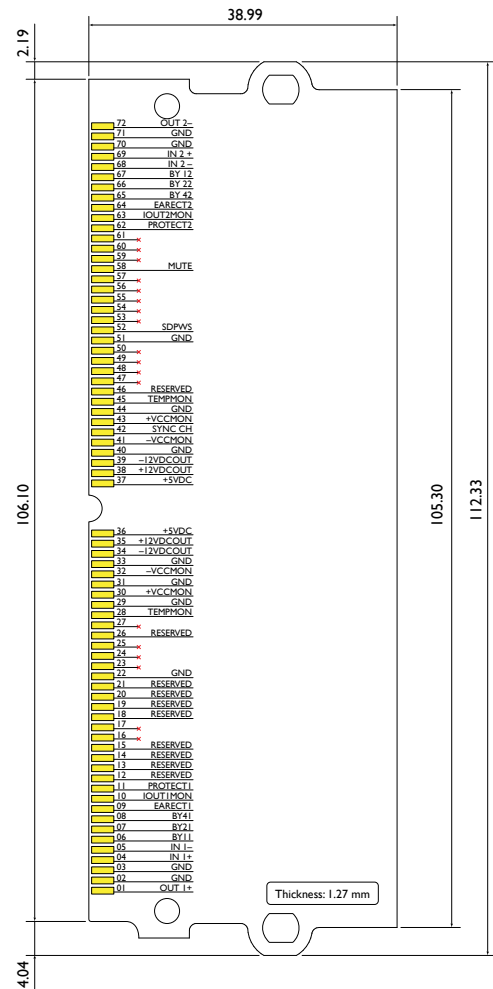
72-pin SIMM board pinout; dimensions in millimeters.
